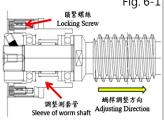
If the backlash too large, rotate M6x50L *2pcs on part (4) clockwise to reduce backlash.
